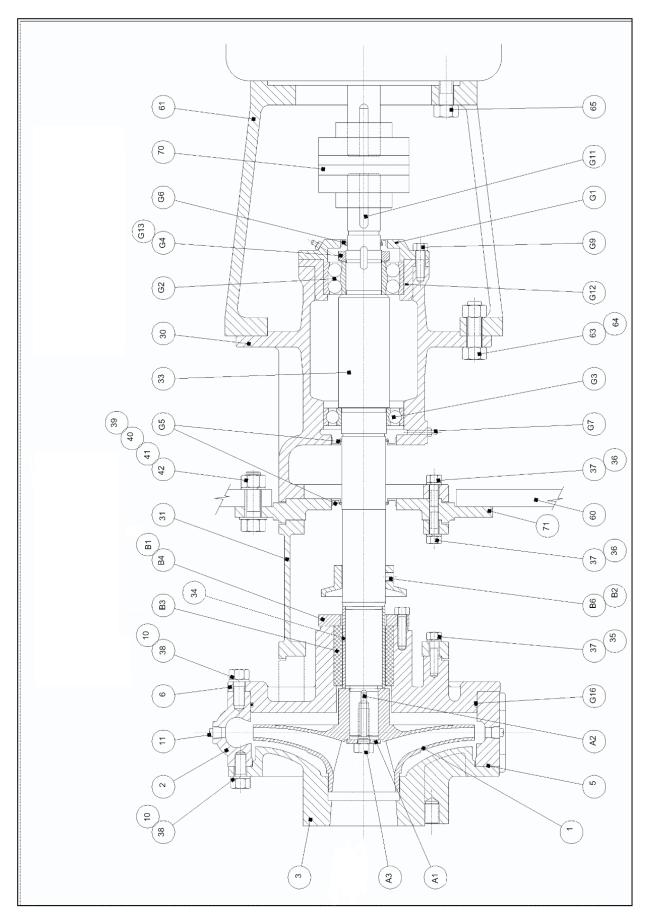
3x2x10 Main Pump Cut Away 1530 Frame Hardened Steel Throttle Bushing
